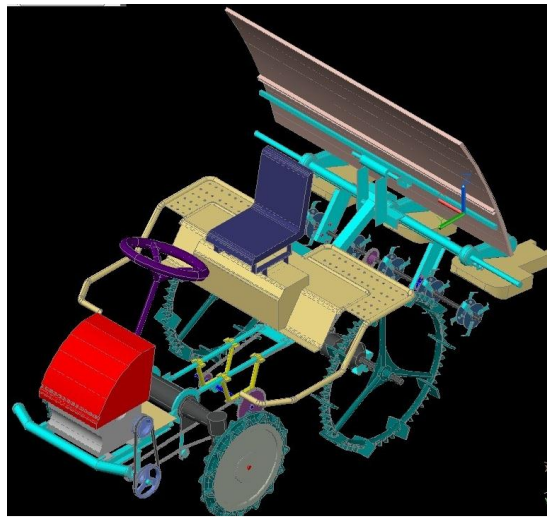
Complete view of the riding type rice transplanter drawing (Isometric view)
